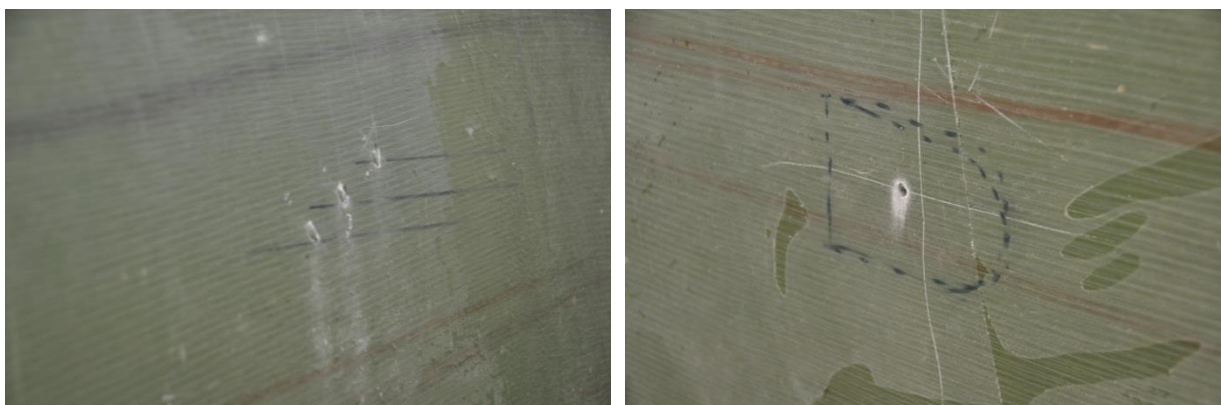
Drilled drain holes and receptor hole for extending lightning protection
